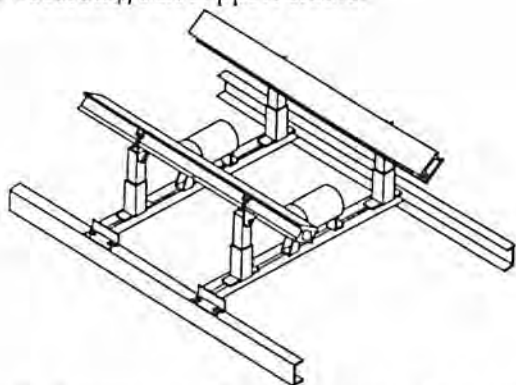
Side-seal belt support cradle with center rollers to reduce friction.
